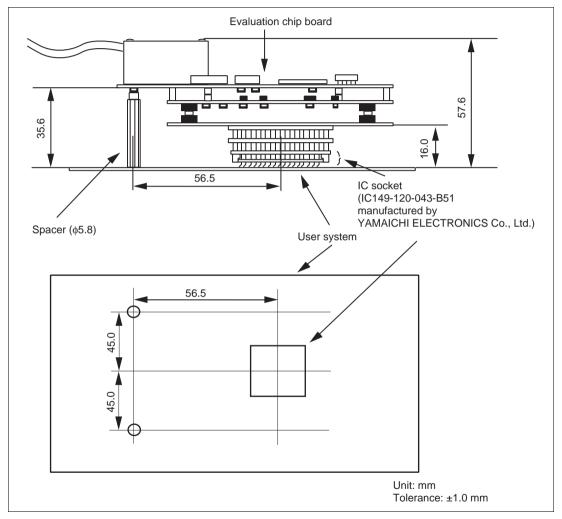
Resulting Dimensions after Connecting User System Interface Board
